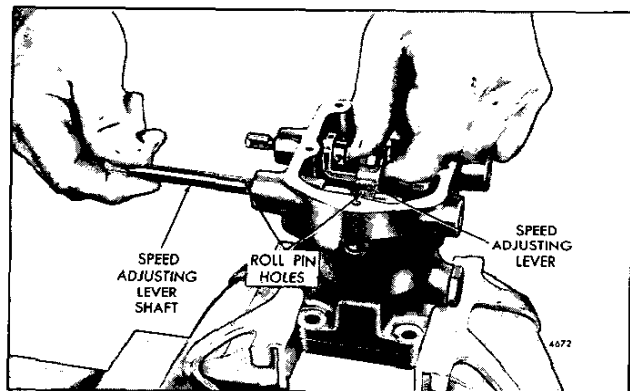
Installing Speed Adjusting Lever Shaft in Governor Housing and Adjusting Lever
